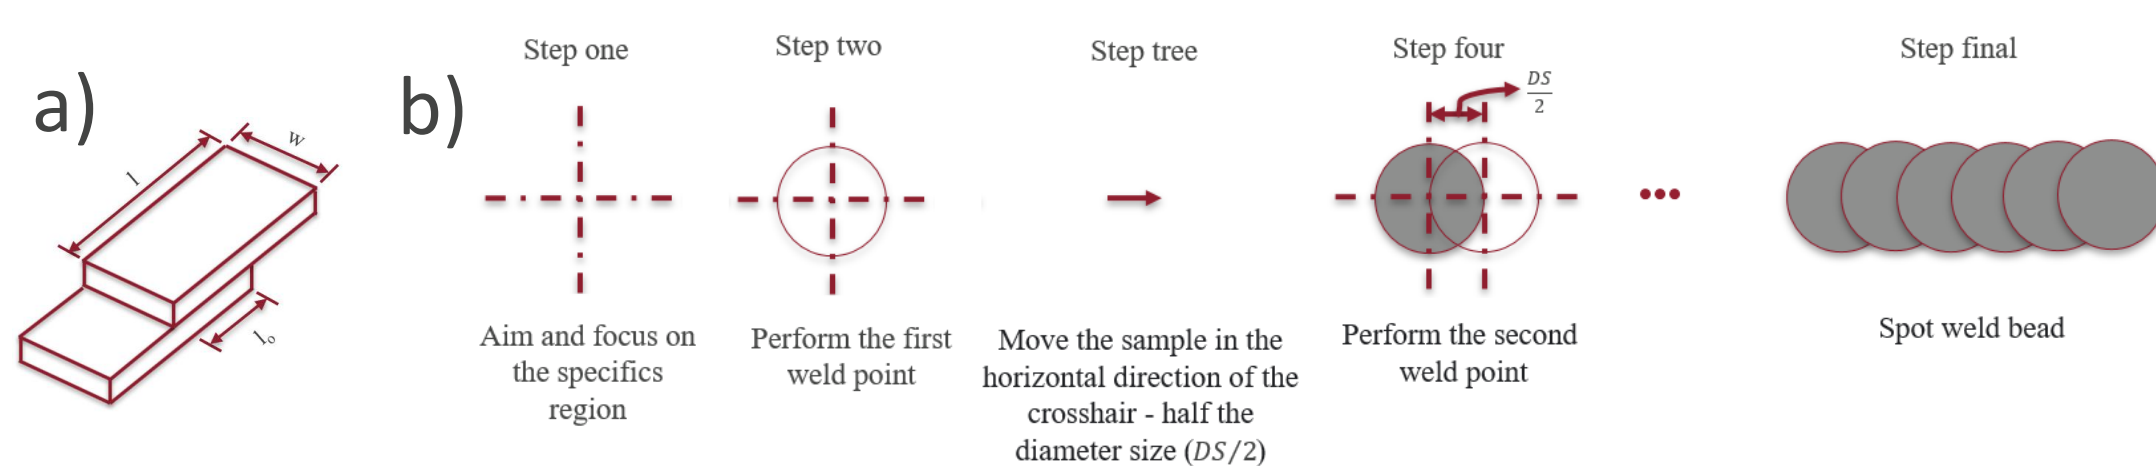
a) Step-by-step procedures for the carrying out of the advance on the spot weld bead.. b) Geometric joint configuration.
